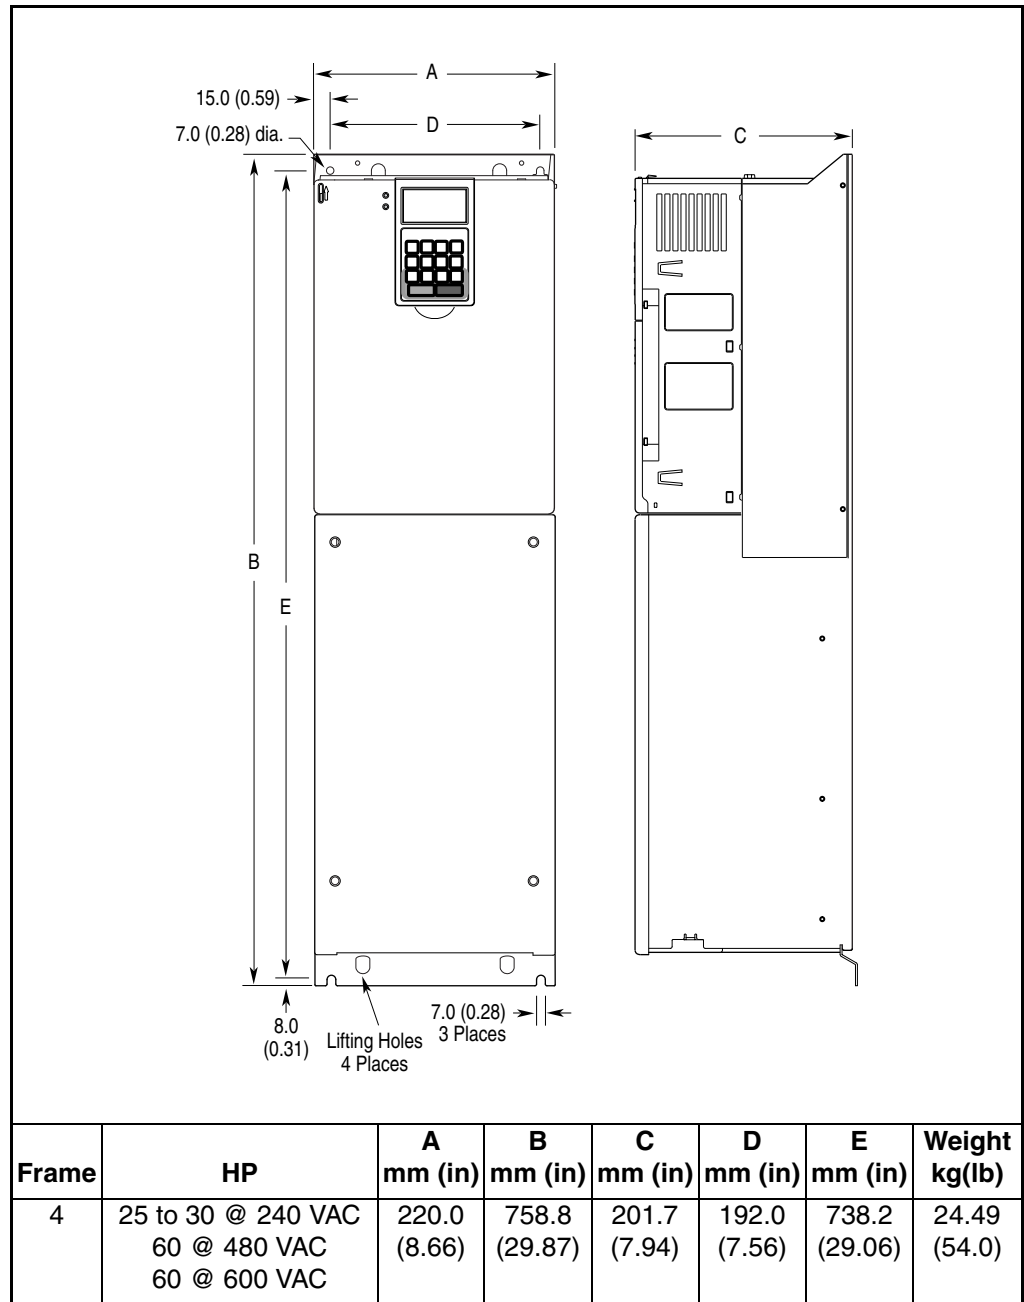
GV6000 Drive Dimensions Frame 4
